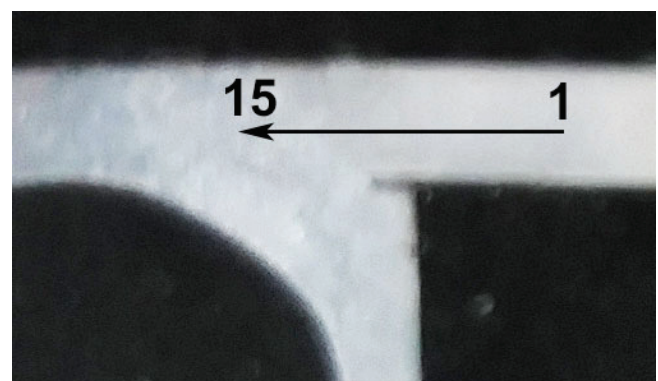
Line of hardness measurements on the weld cross-section 3 (1 and 15 – markings of the extreme measurement points – table)
